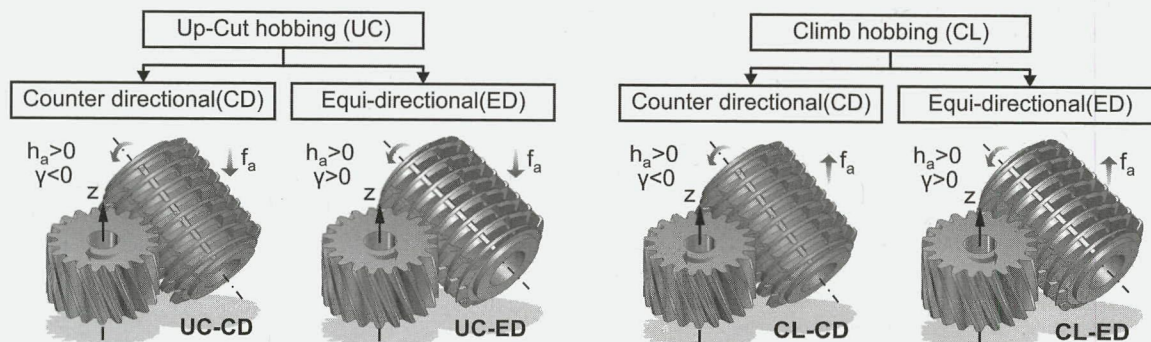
The four possible kinematics of gear hobbing considering the direction of the axial feed and the applied gearing
